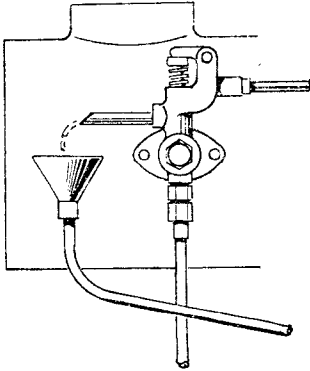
Spill device fitted to Hornsby-Akroyd oil engine
